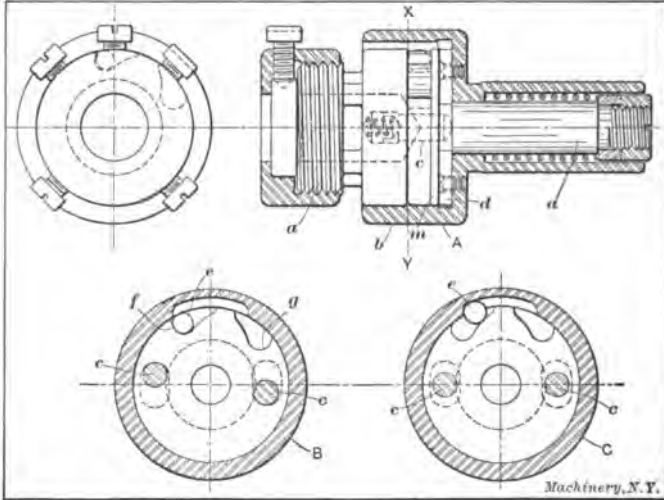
Illustration showing Operating Parts of Releasing Button Die Holder
